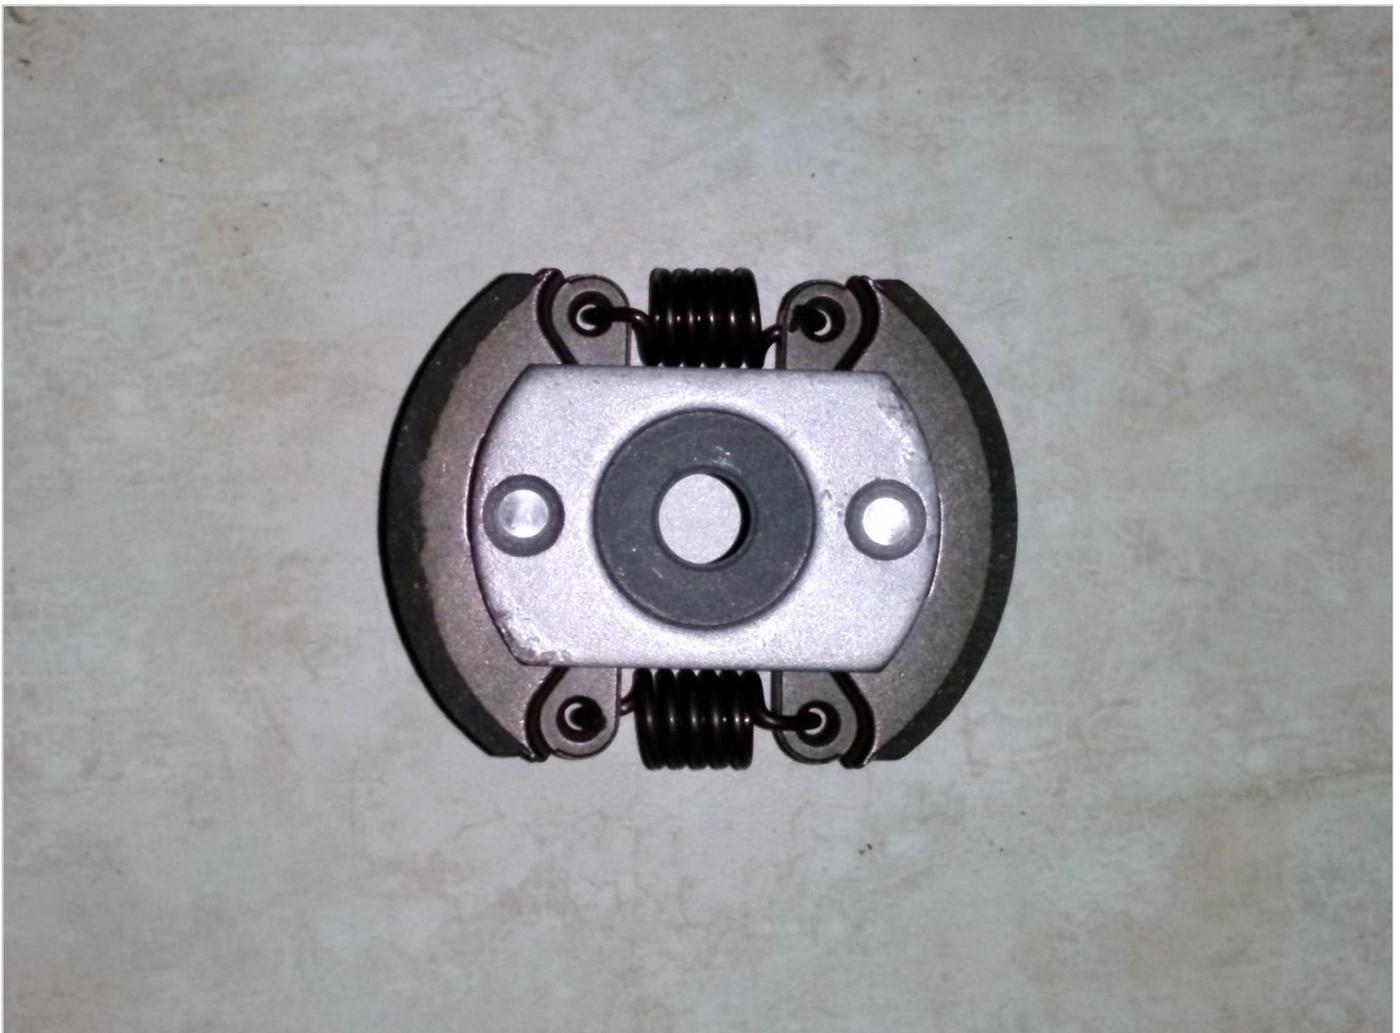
Top view of the CTS Clutch Assembly, showing the two clutch shoes, springs, and central mounting hub.
